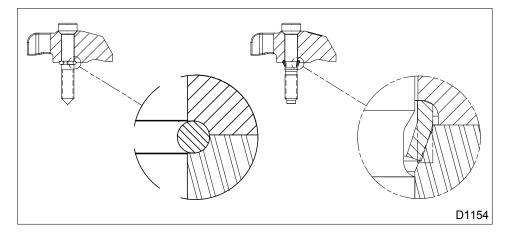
Injector Clamp Designs - Early "C"- Type (left), Current (right)
